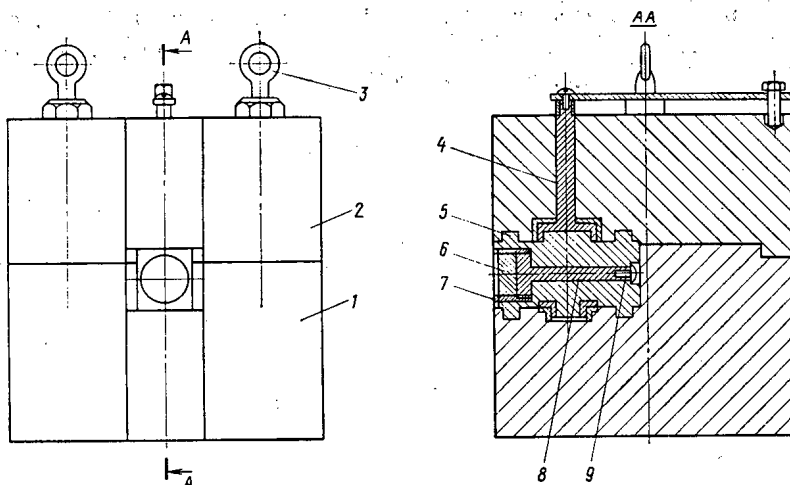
Container; 1, 2) lower and upper halves; 3) tightening bolts; 4) handle for turning holder; 5) holder; 6) IRUS-1 source; 7) yoke for source; 8) rod; 9) fixing screw.
